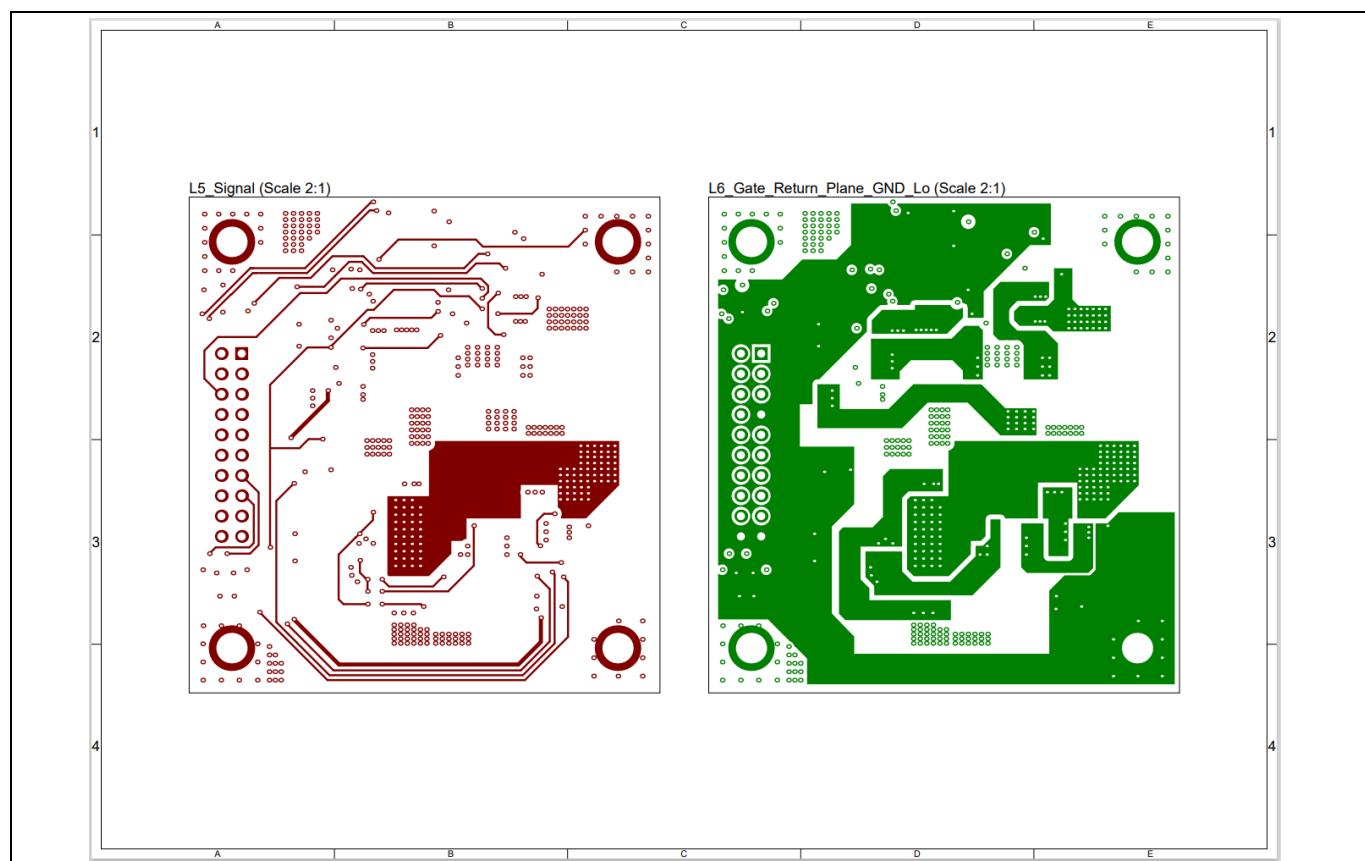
PCB layout of the DC-DC converter layer 5 and 6
